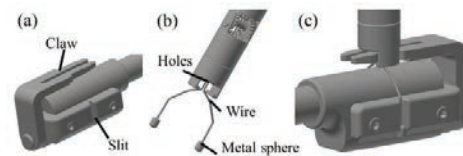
Design of the assembling mechanism: (a) Miniature LUS probe; (b) Tip of manipulator; (c) Tip after assembly
